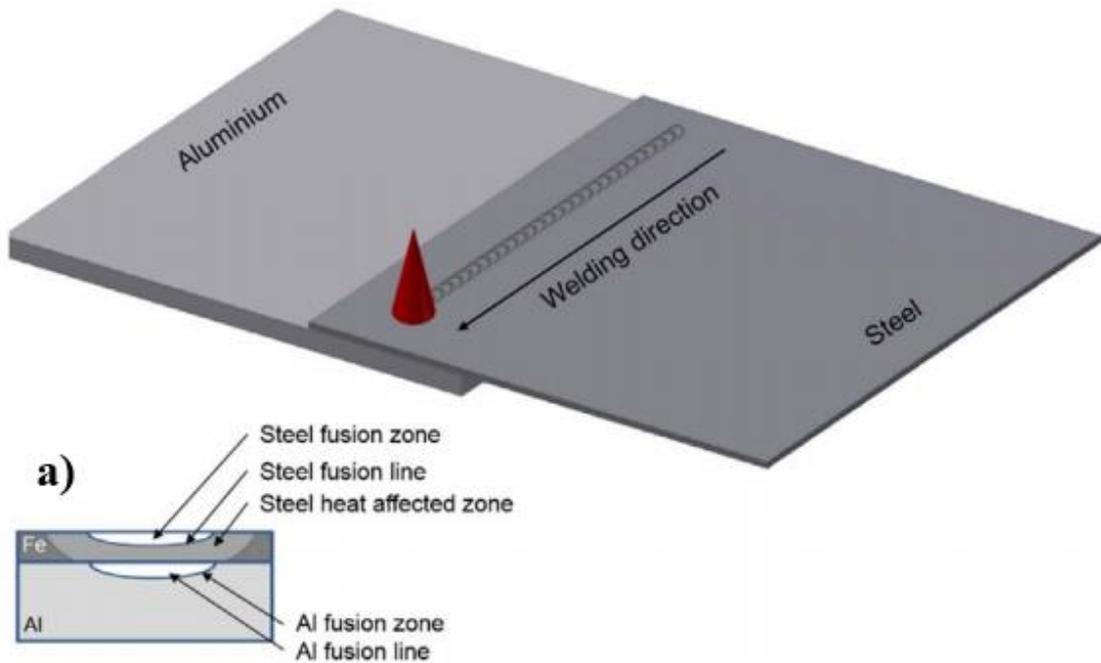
Joining Al and steel together using laser welding (Mod. Mecco et al, 2017).
